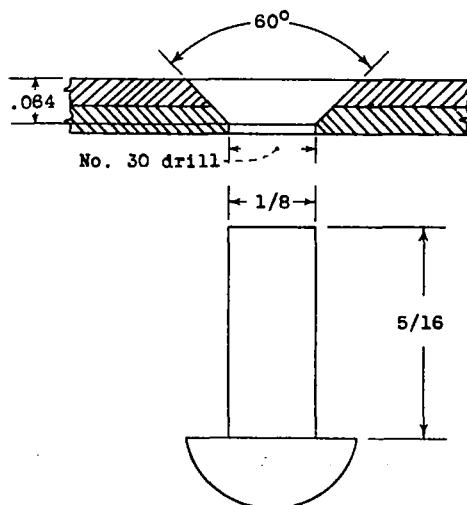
Dimensions of roundhead rivet and angle of countersink used in riveting method E for 1/8-in. rivet.
